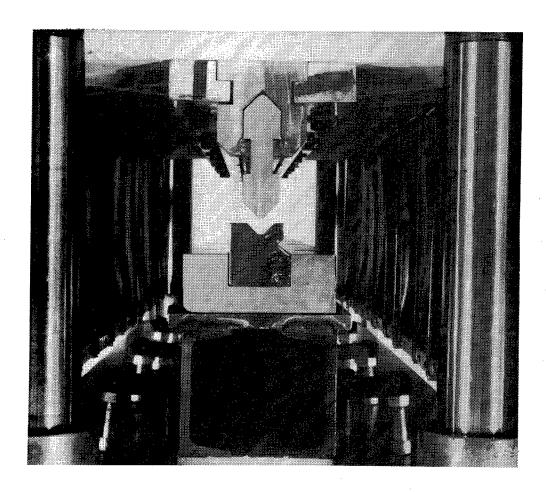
Closeup View of Die Holder and Dies in the Hot Forming Press.
